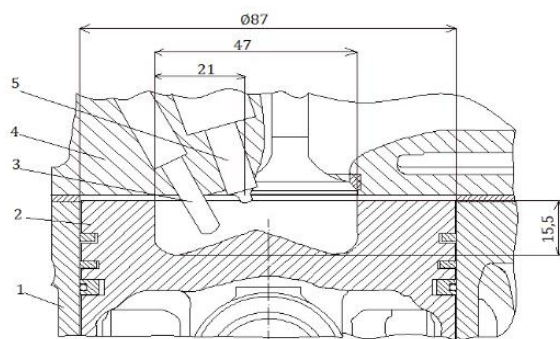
Combustion chamber parameters of Kubota D1703-M-DI Diesel engine. 1. Cylinder, 2. Piston, 3. Dryer shaft, 4. Engine cover, 5. Nozzle.
